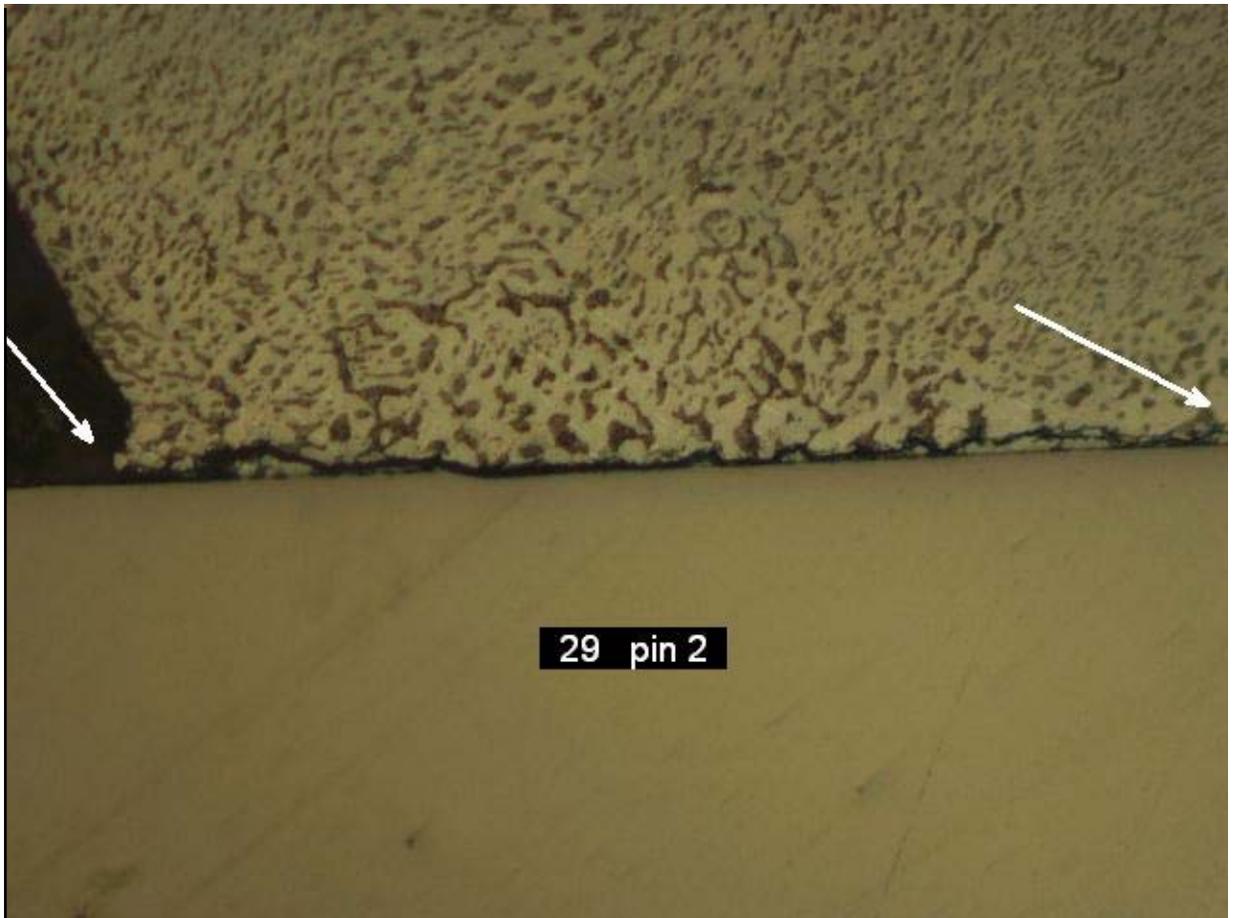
Higher magnification image showing the crack on the other side of the cross-sectioned pin.
